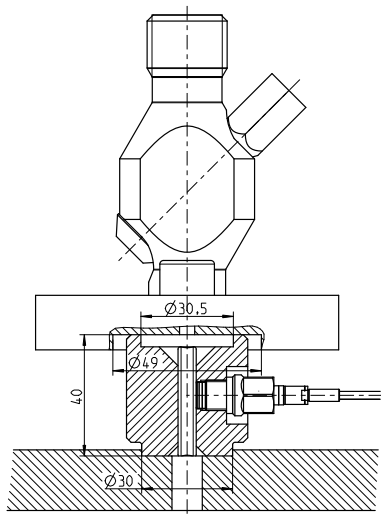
Mounting with ring adapter Type 7523B10 on MAN 2-stroke engine
